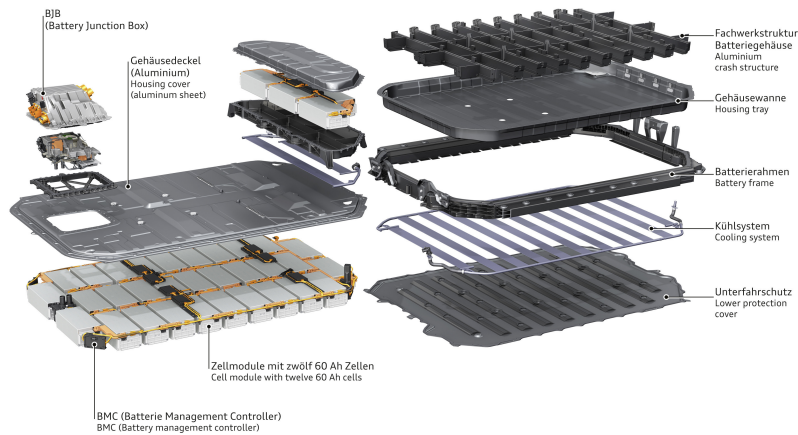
Exploded view of the HV-Battery [37] (Courtesy of Audi)
